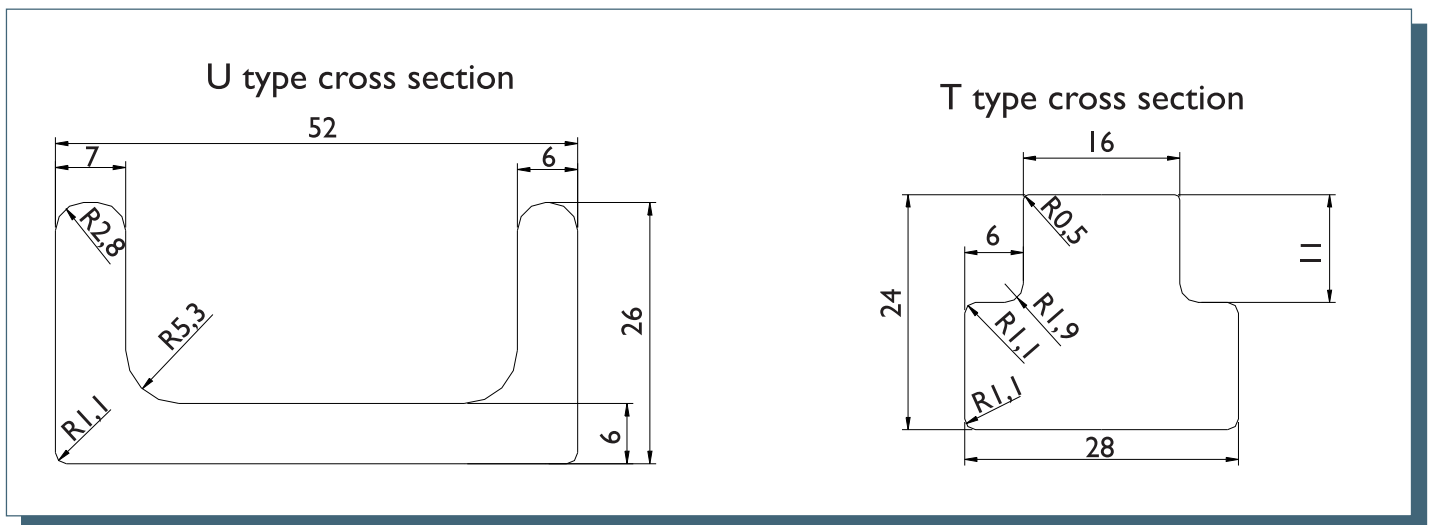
Different shapes and dimensions (mm) of the cross sections of the extruded products: U-shape T-shape.
